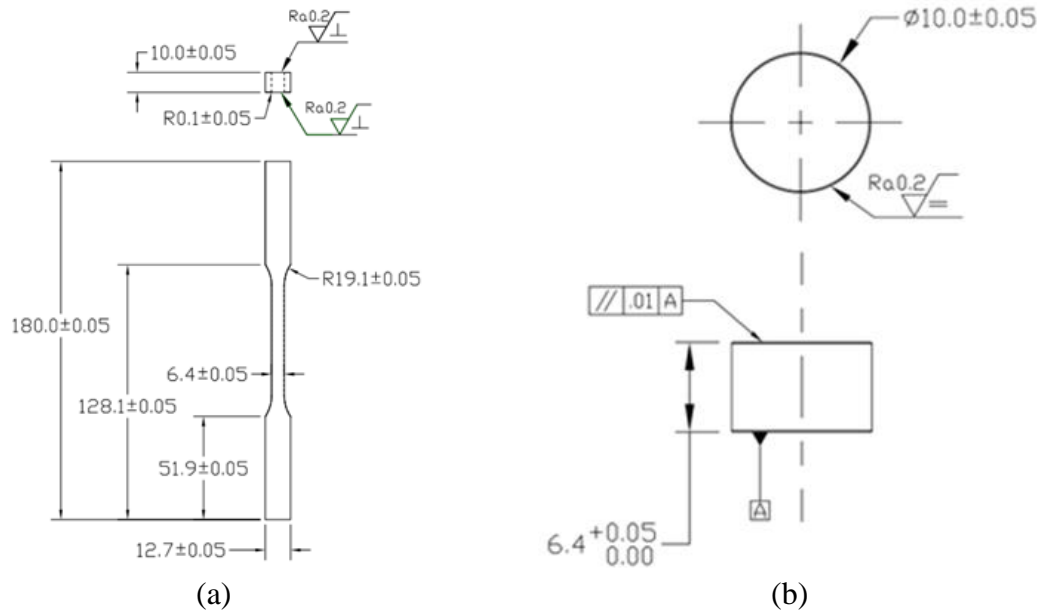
Geometry and dimensions of (a) Specimen; and (b) Contact pad (all the length dimensions in mm and the surface roughness 'Ra' is in μm).
